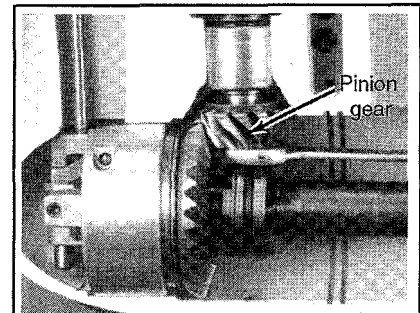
while the pinion nut is held with a special tool or suitable wrench
